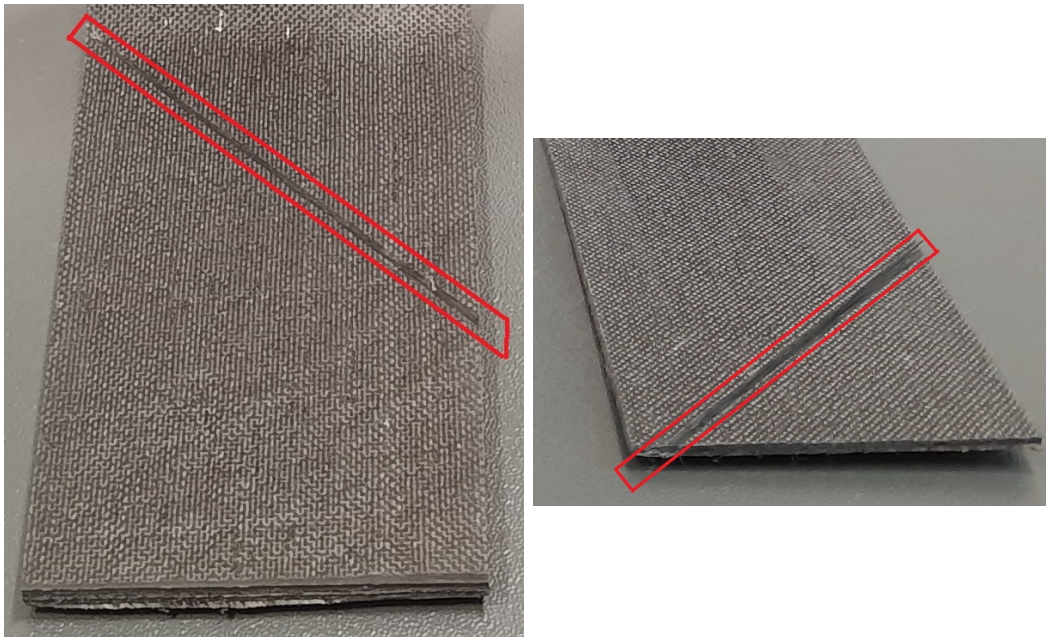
Fibre pull out from the specimen surface at the removal of the consumables (left: SK₁₆ specimen 2 manufactured with the MRCC, right: AS₈ specimen 3 manufactured with the "Fast" curing cycle.)
